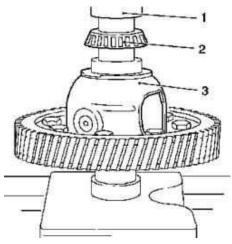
Installing the inner rings: 1 - a special tool, 2 - inner ring, 3 - differential housing
